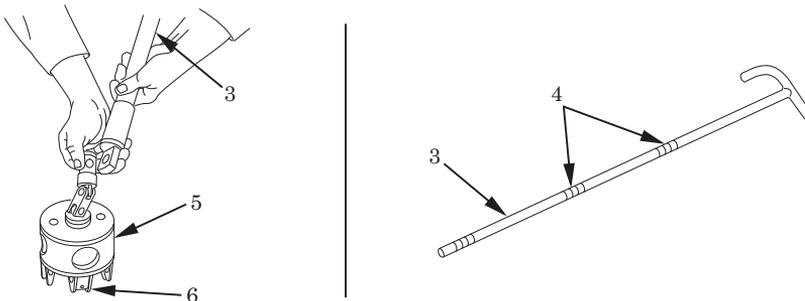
Cartridge Extractor and Artillery Cleaning Staff Assembly.
